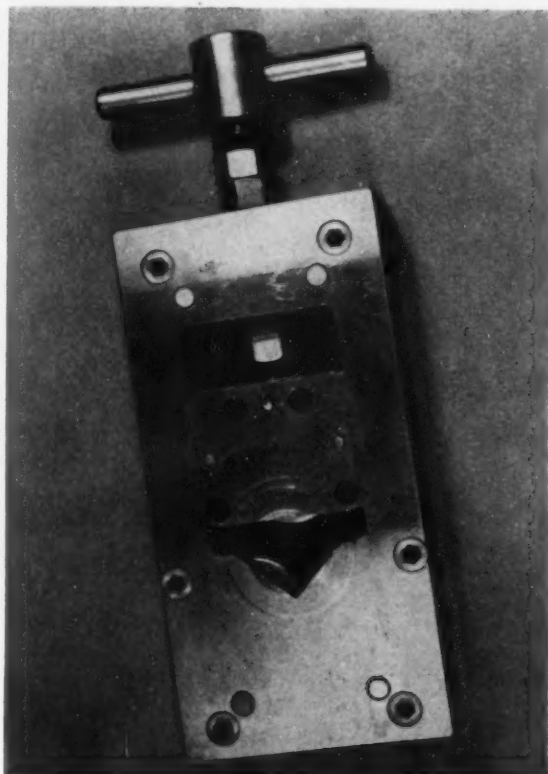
Frame carries two fixed rollers and a third which may be adjusted during operation by a feed screw. Rollers turn on precision needle bearings.
